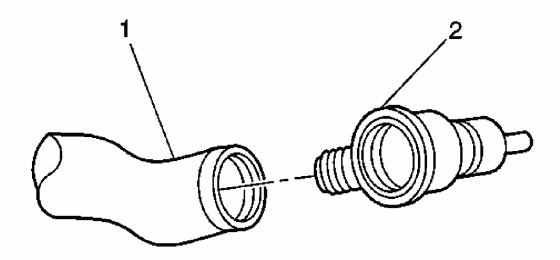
View Of Vacuum Brake Booster Check Valve And Vacuum Brake Booster Hose Courtesy of GENERAL MOTORS CORP.
